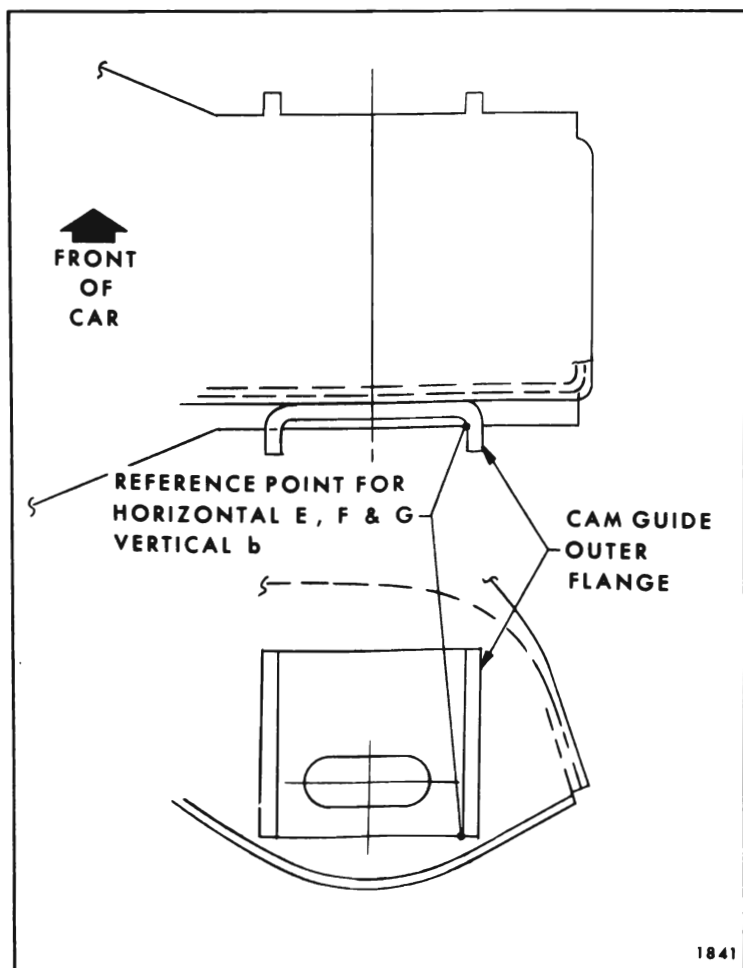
Lower Control Arm Adjusting Cam Guide
